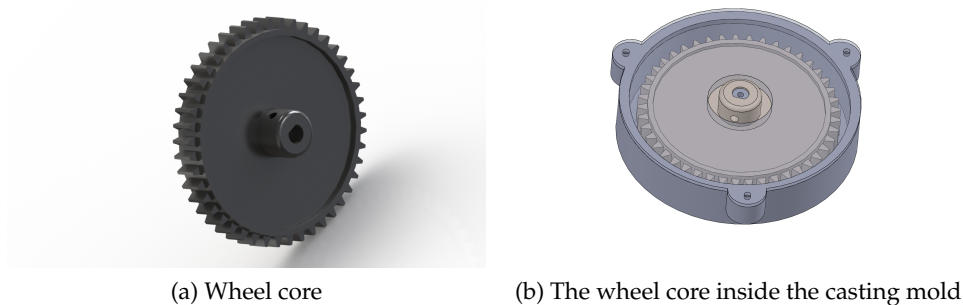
Solidworks models of the parts used in the wheel casting process.
